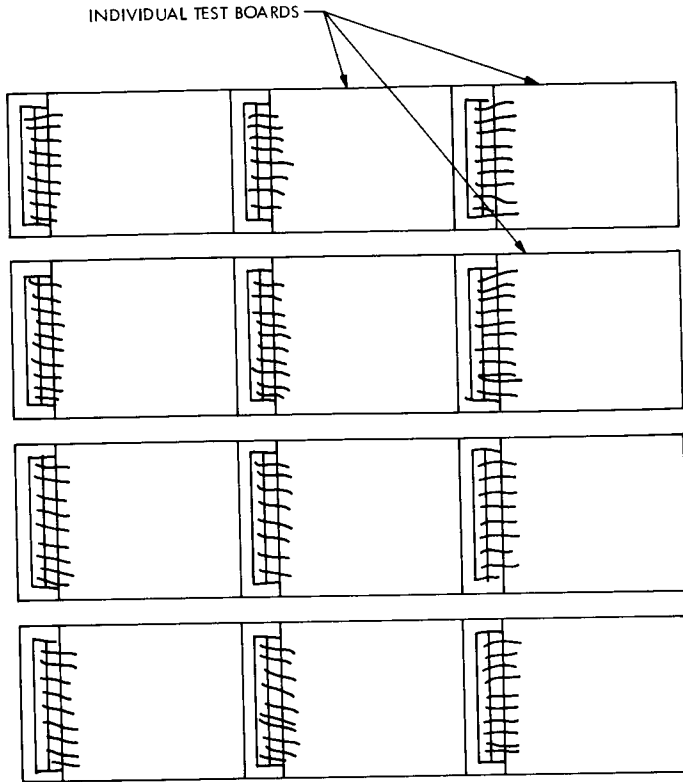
Arrangement of assembly of test boards. Assembly to be moved as a group past fixed particle beam
